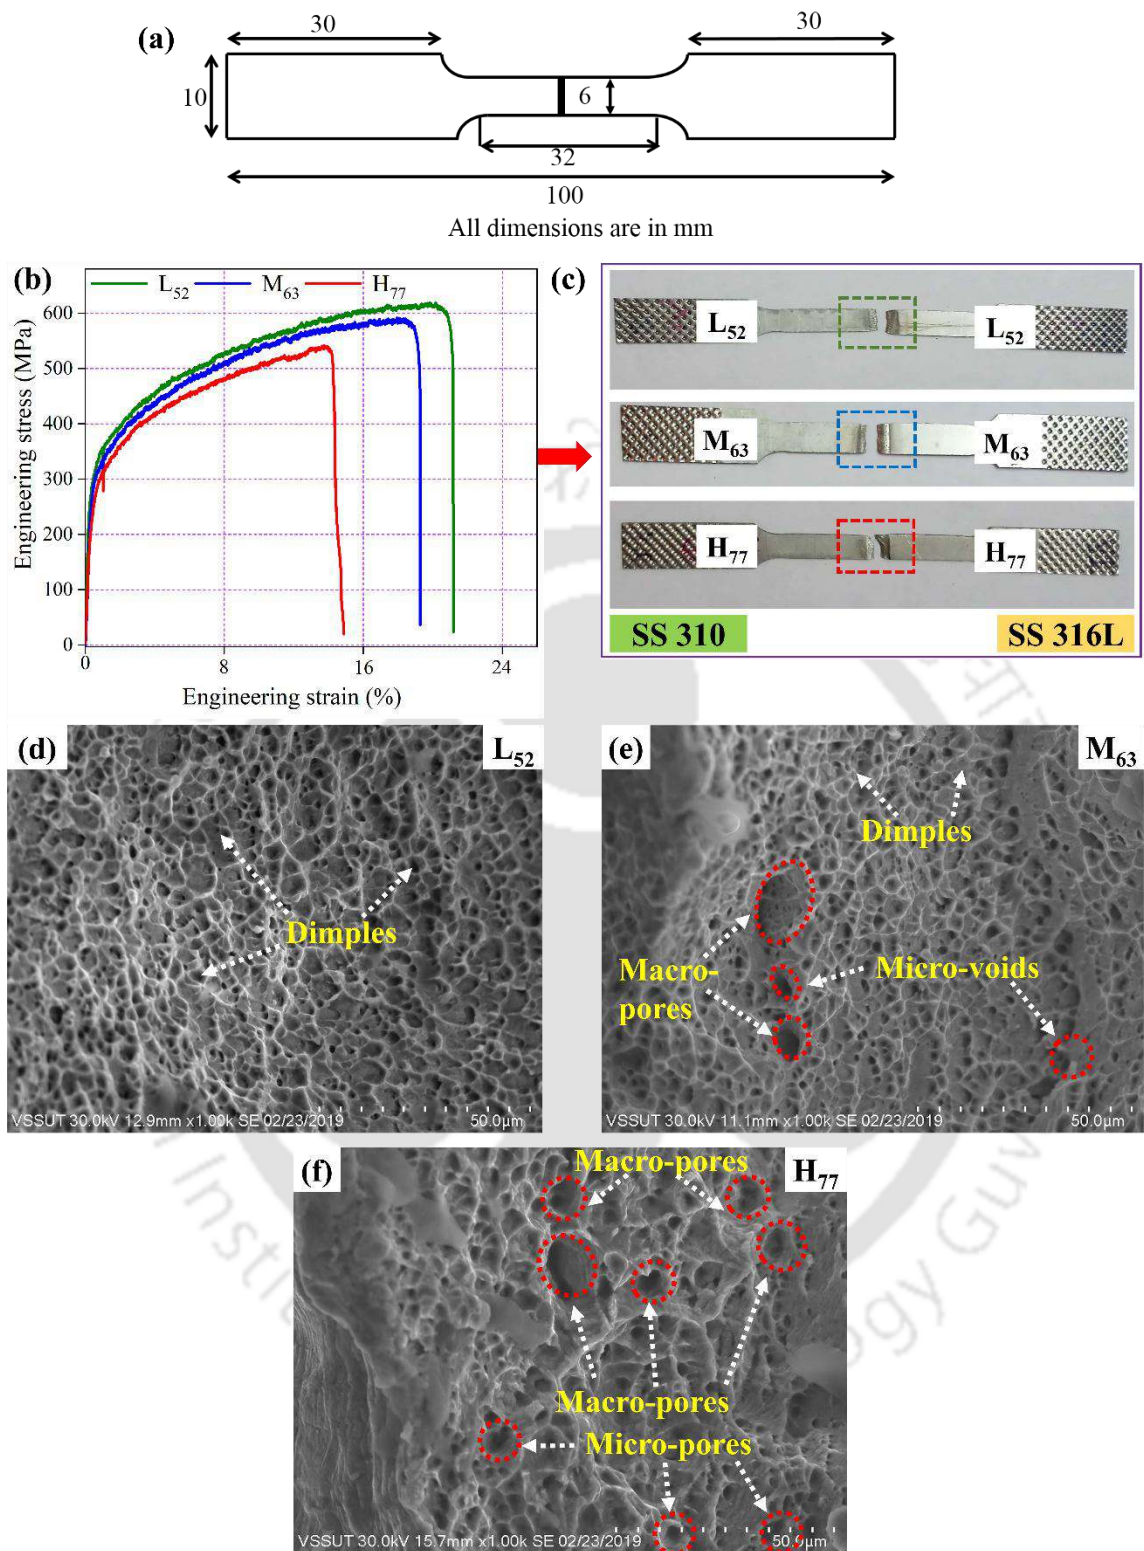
Depicts (a) tensile specimen as per ASTM E8 standard, (b) engineering stress-strain curve, (c) photograph of failed tensile test specimens, (d-f) electron microscopic images of the fracture surface for the weld joints fabricated at different process conditions (L₅₂, M₆₃, and H₇₇).
